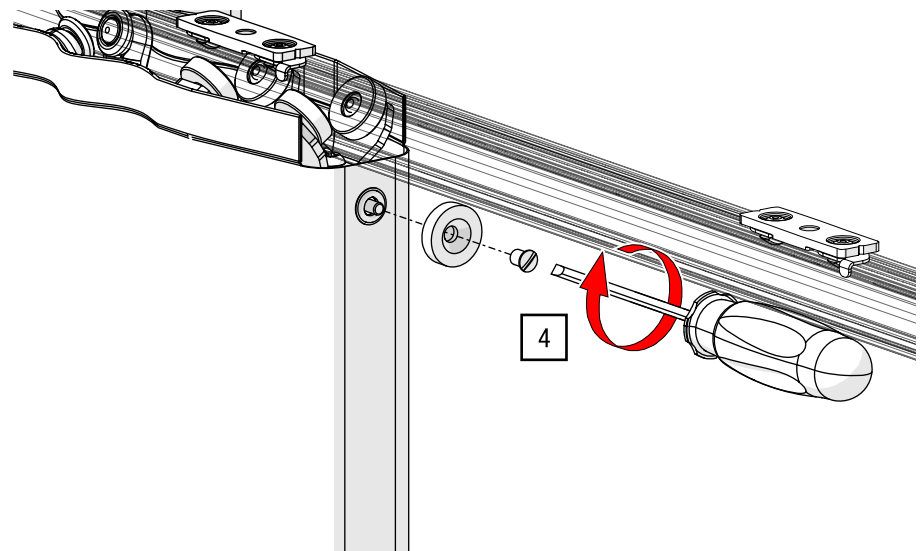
Master runner – Mount magnet catch plate (2/2)
